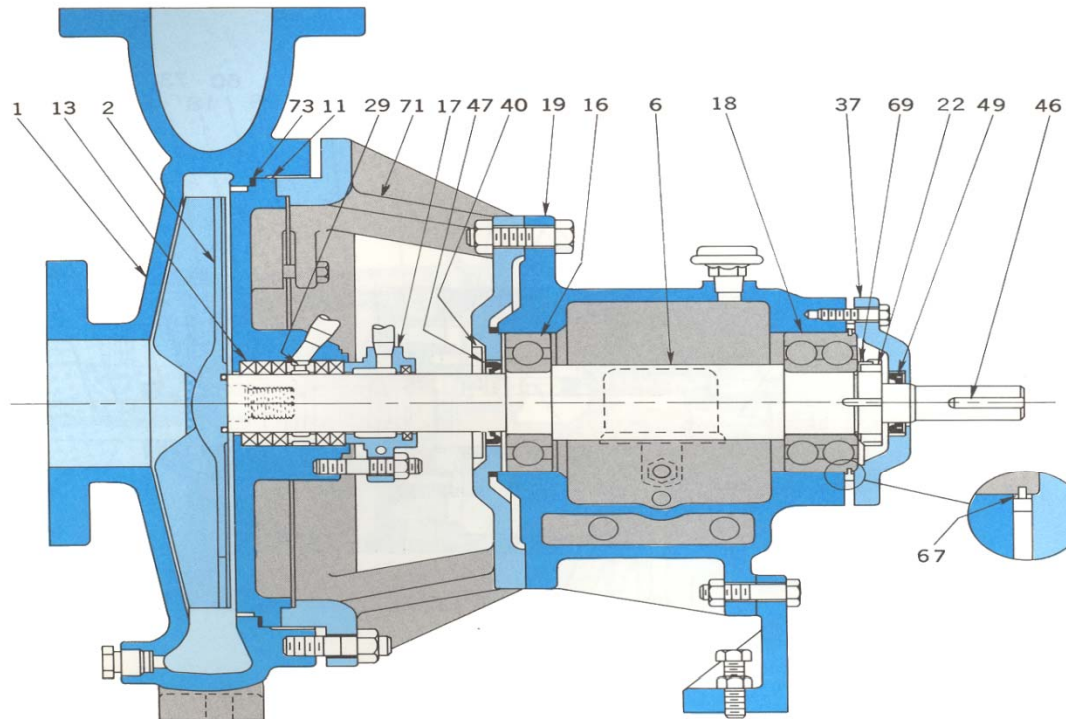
OVERHUNG IMPELLER, SEPARATELY COUPLED, SINGLE STAGE, FRAME MOUNTED, ANSI B73.1
